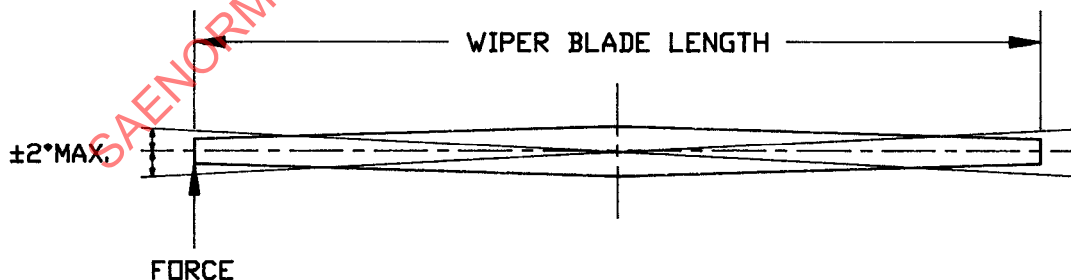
LATERAL ANGULAR MOVEMENT - WIPER BLADE TO WIPER ARM
